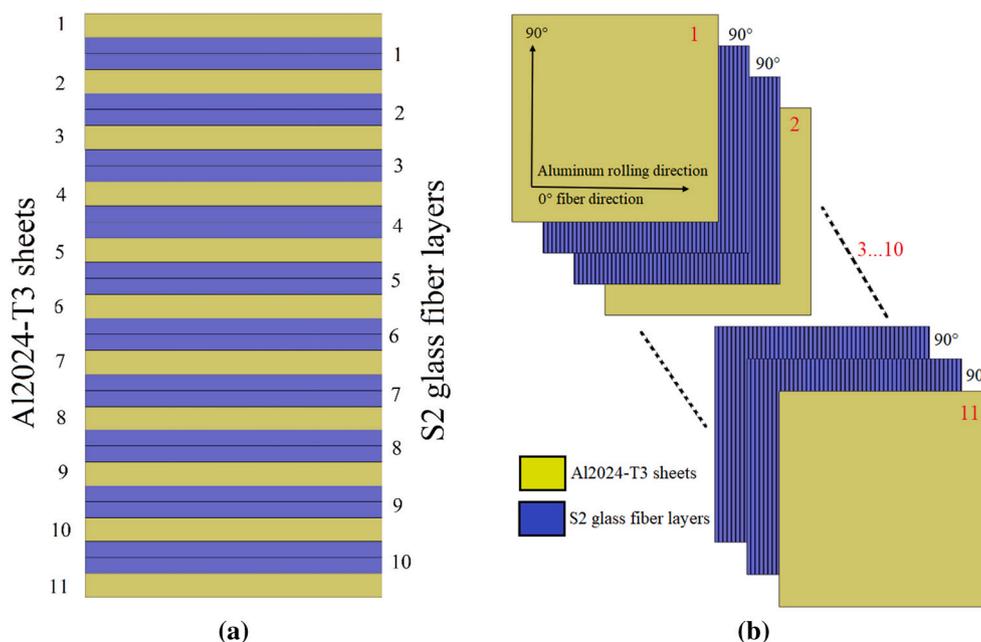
GLARE workpiece details (a) side view (b) constituents order.
